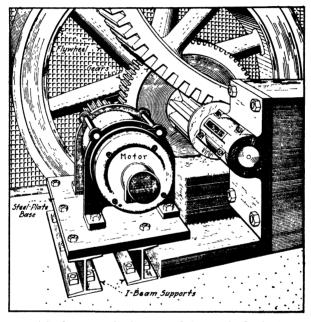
A 7.5 hp. motor firmly mounted close to the flywheel of a punch, on a 1-in. steel plate supported on two 5-in. standard H-section members. (A. S. Mill, Electrical Review and Industrial Engineer, p. 119, March, 1922.)
